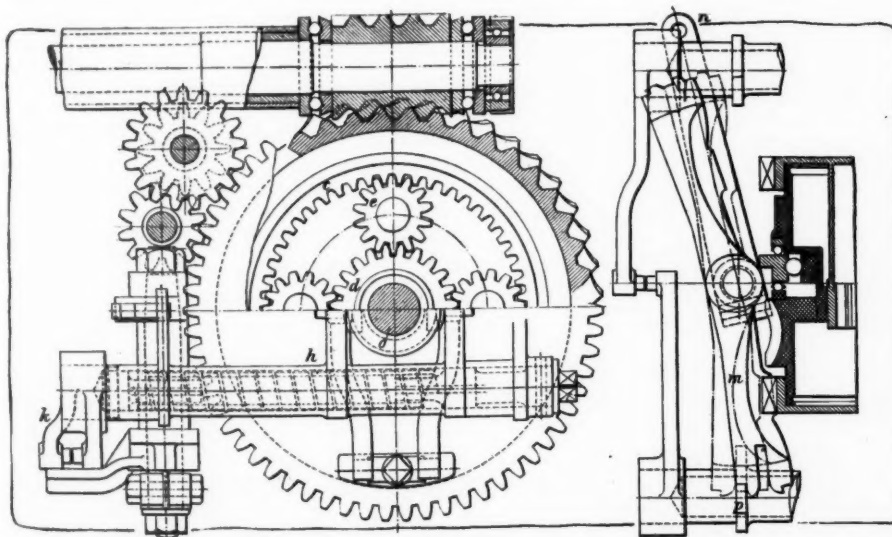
Left side view, partly in section at middle plane of worm. Fig. 4—Top view of pivoted bar in position for blocking sun wheel and interlocked with clutch control at *p
